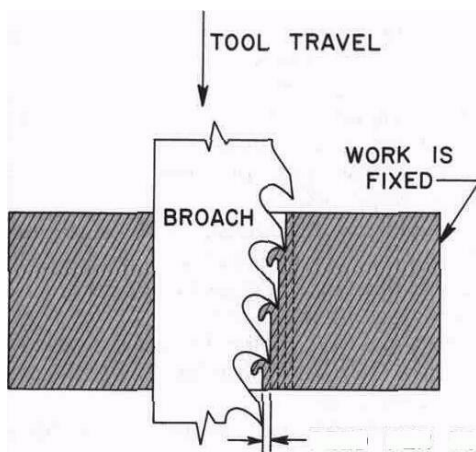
Each tooth on a broaching tool removes a small amount of material.
